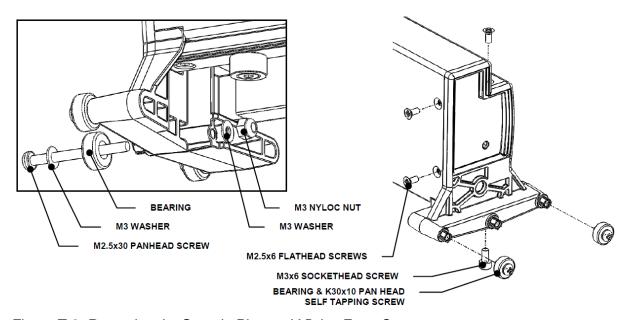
Removing the Sample Pipettor Y Drive Front Cap
